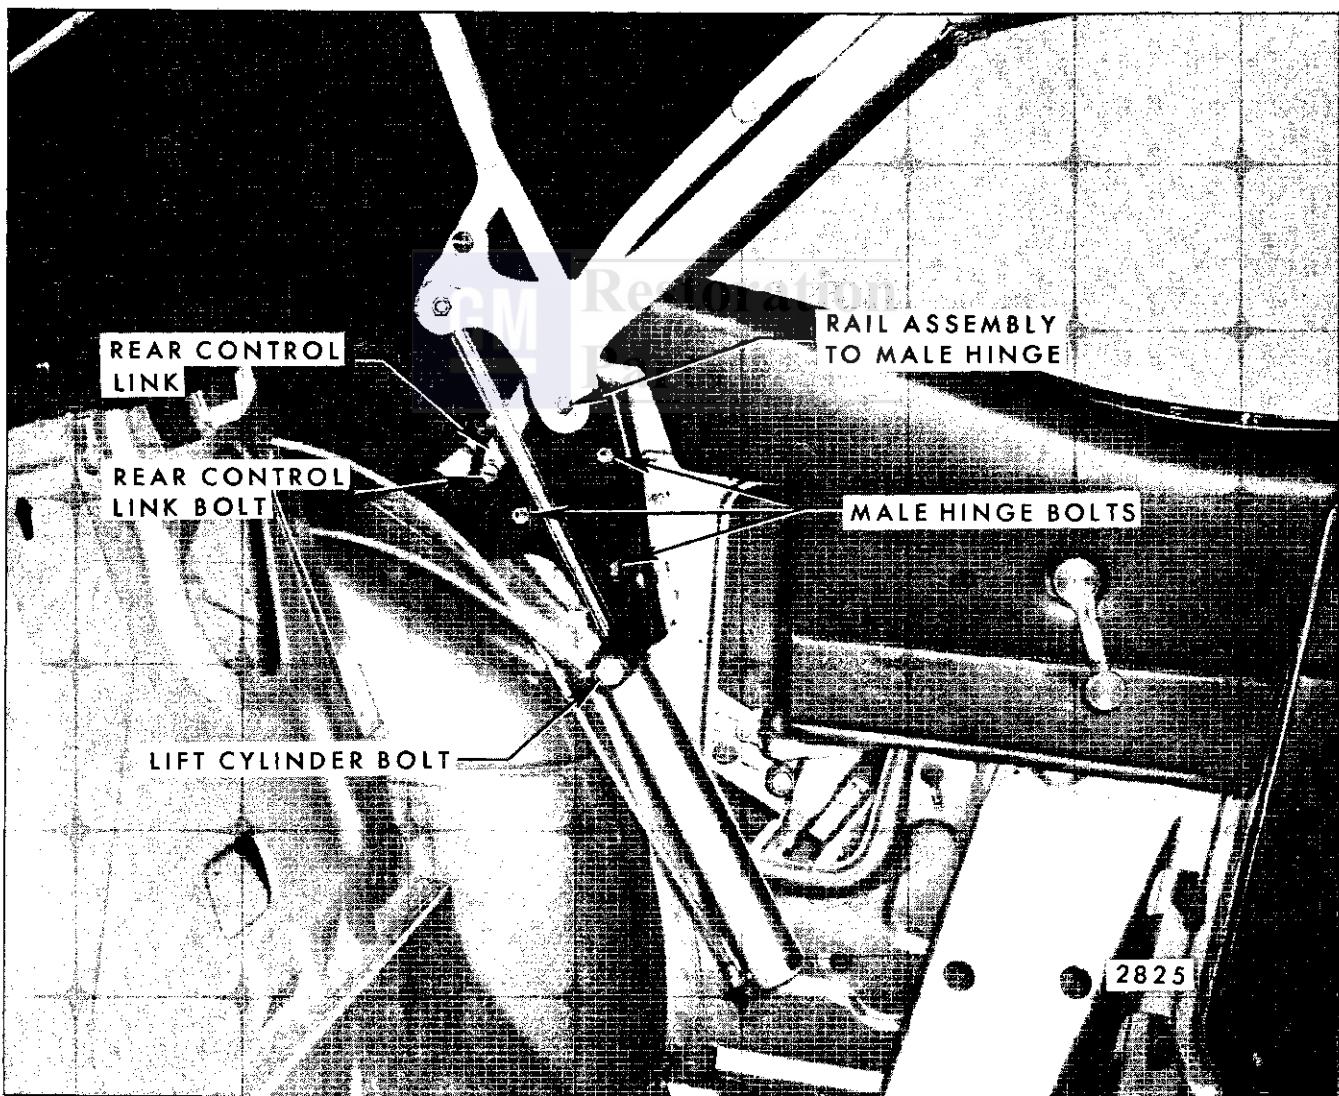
"A" Body Hydraulic Lift Cylinder Attachment
